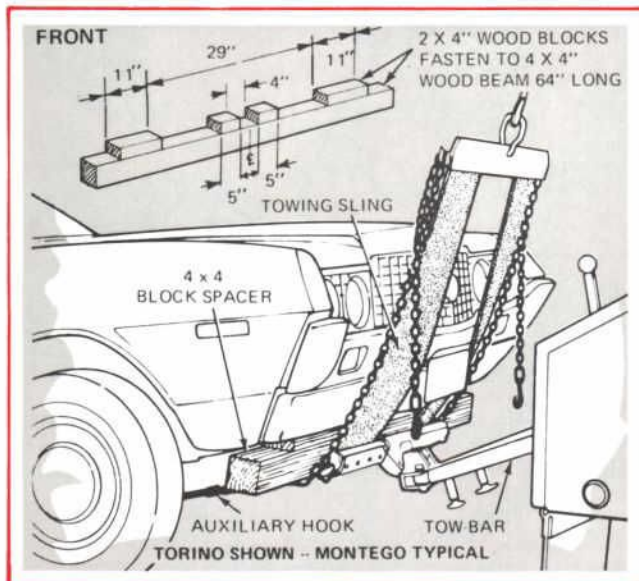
Note that a special wood block spacer is needed when towing a 1972 Torino (Montego typical) from the front end. This can be made locally in a few minutes and will prevent front end damage during the towing process.
